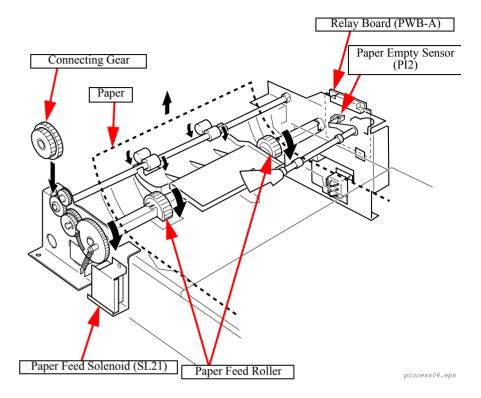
Paper Feed Mechanism (Lower Cassette Unit)
